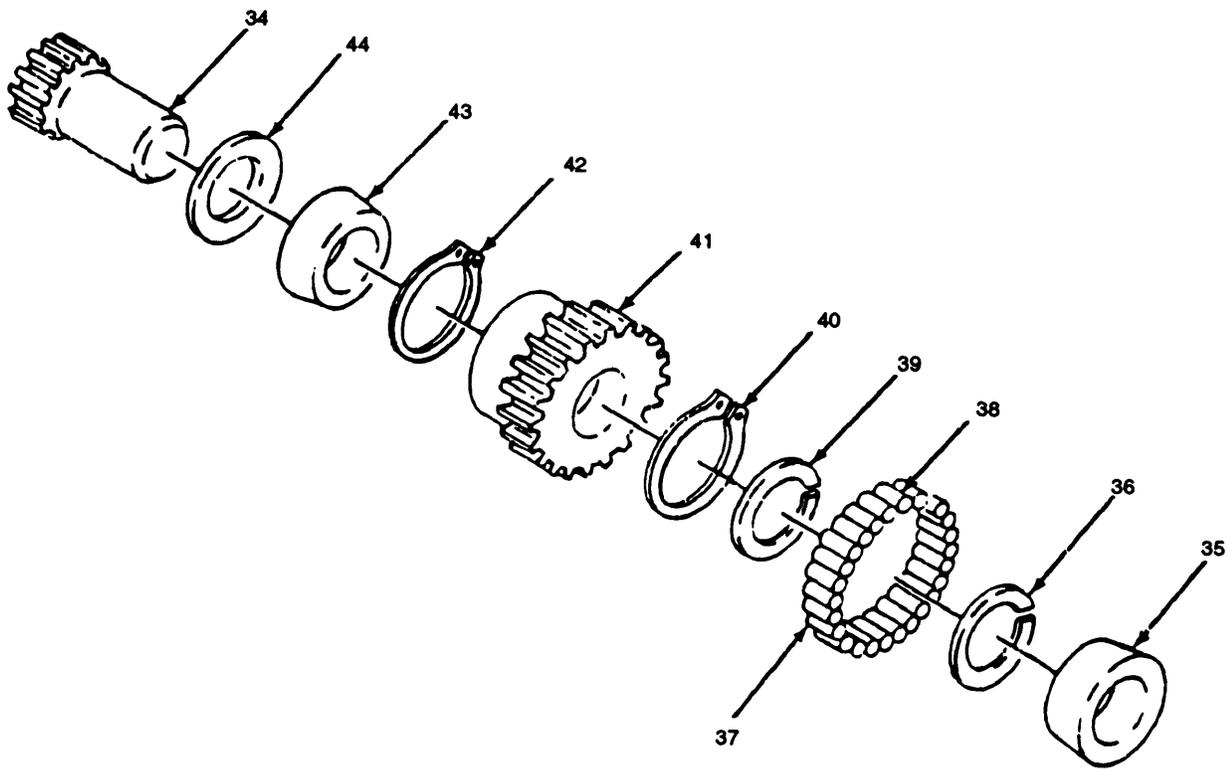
Winch Assembly Model 11-S-EC, Reassembly (Sheet 4 of 10).
